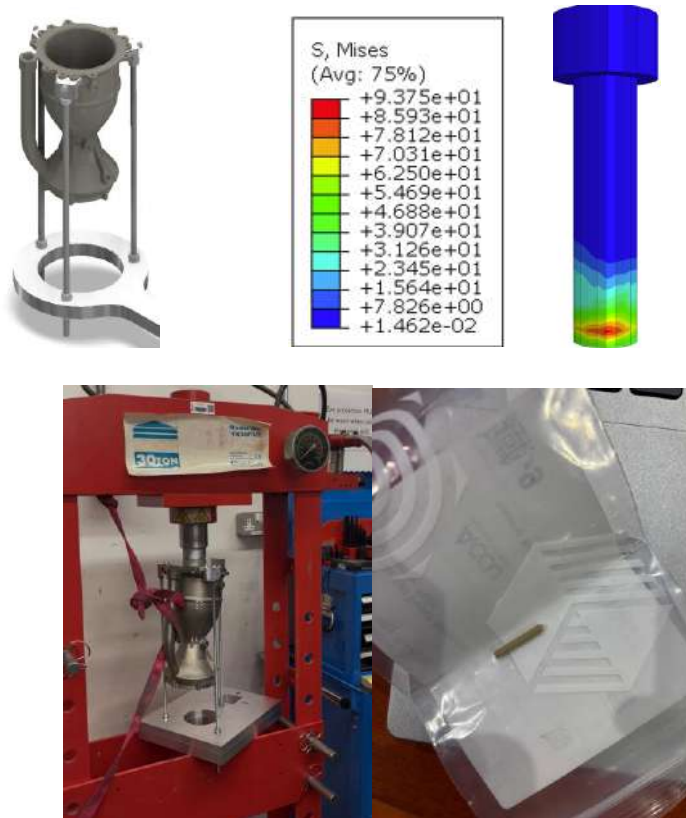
Thrust mount render (Top-left), Bolt FEA (Top-Right), Test setup (Bottom-Left) & Post-Test (Bottom-Right)
